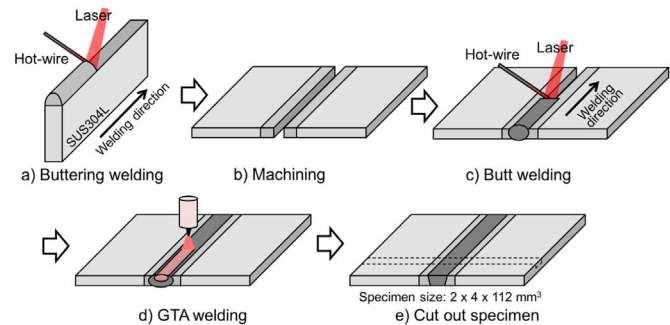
Schematic illustration of specimen fabrication steps using hot-wire laser welding process.
